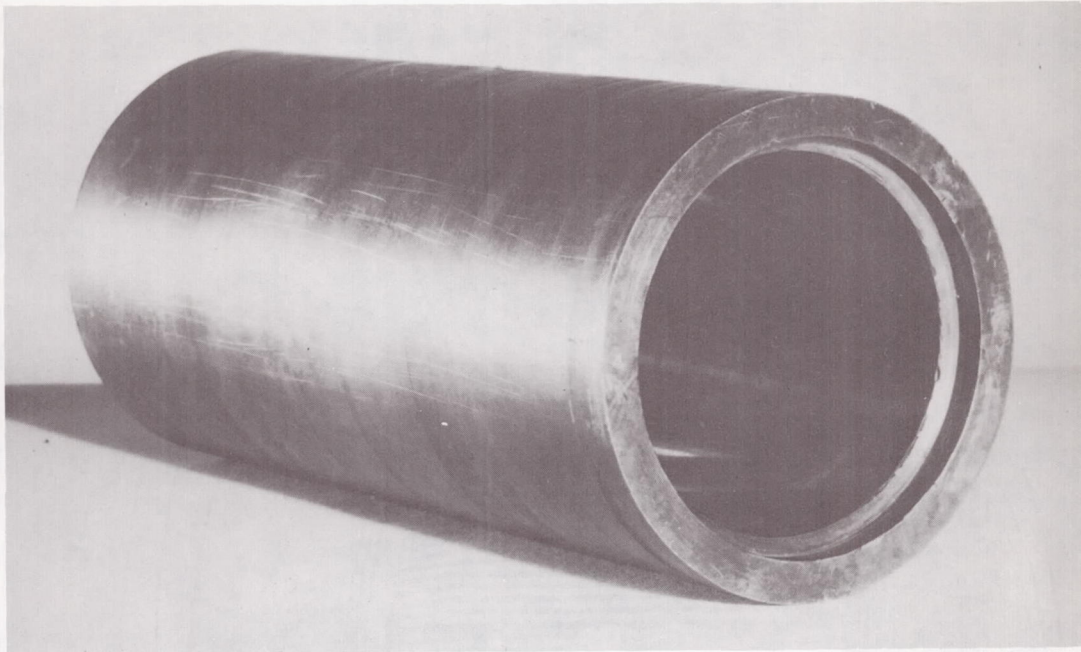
Copper Heat Shunt Test Specimen (M-33431)
